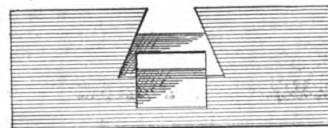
Bottom View of Piece Shown in Fig. 2.
